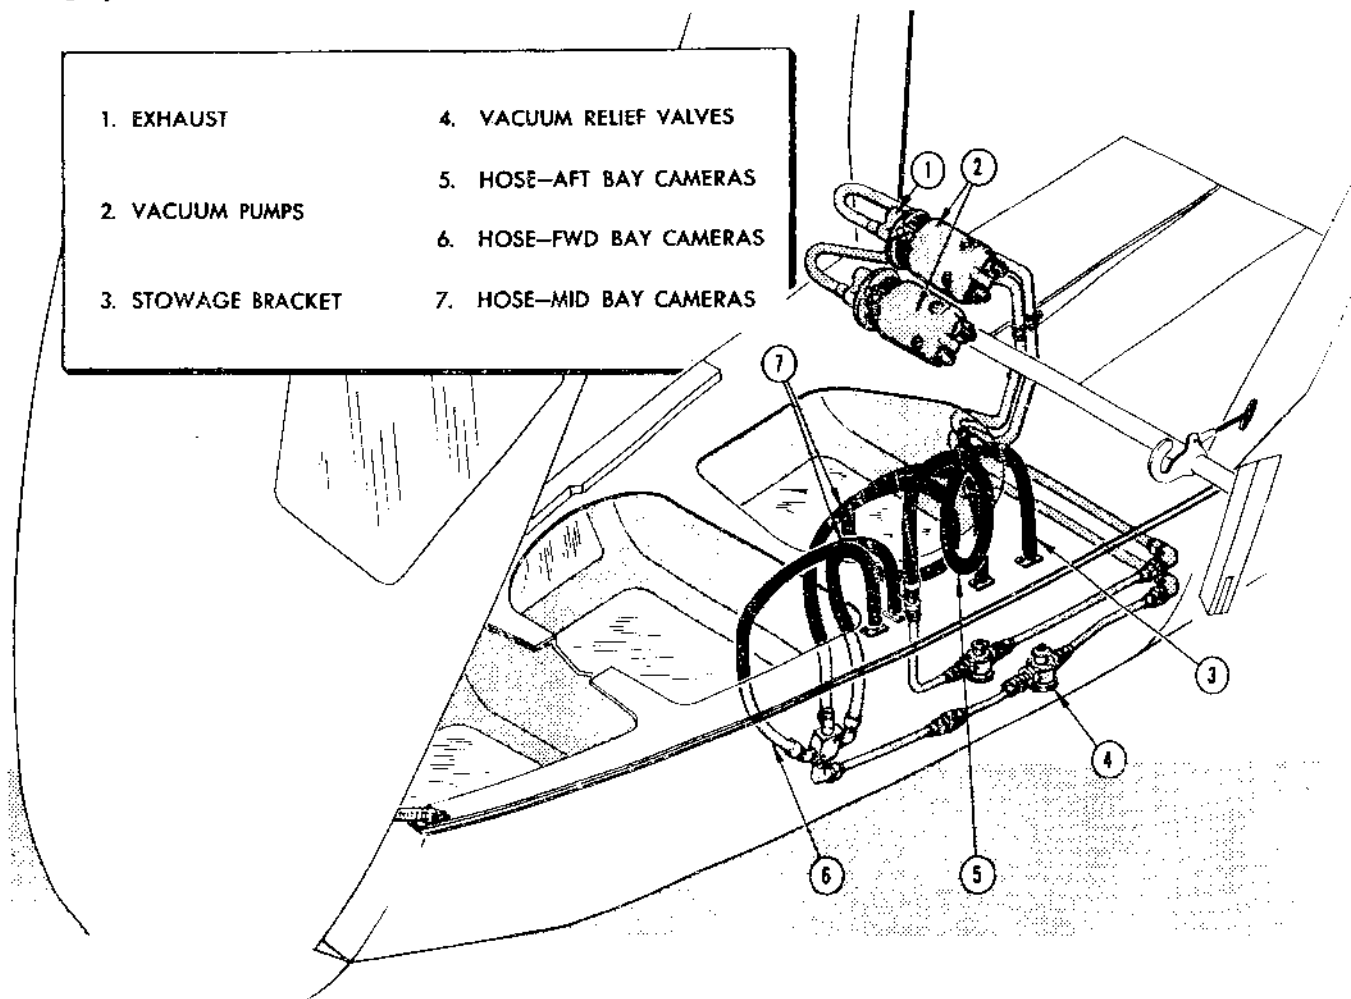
Vacuum System, RF-80A-5, RF-80A-10, and RF-80A-20 Airplanes
